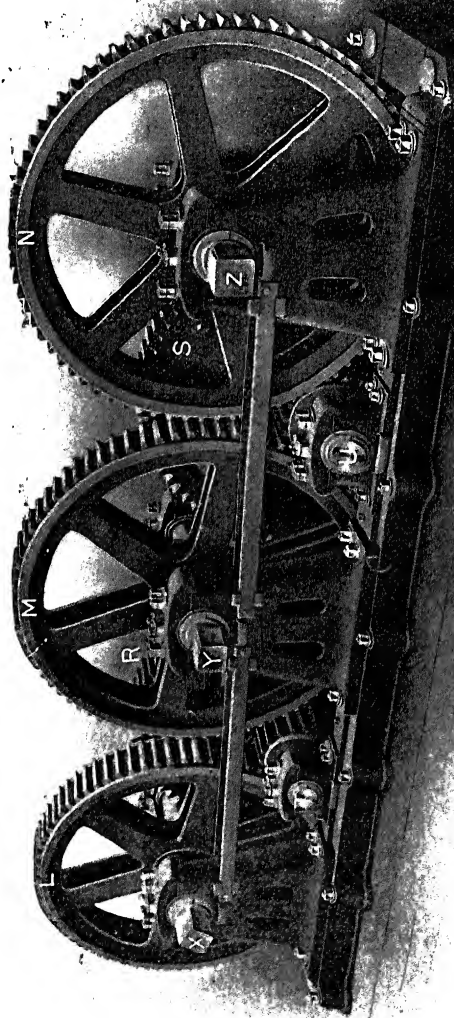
Separate view of the gearing of the installation shown in Fig. 59.
